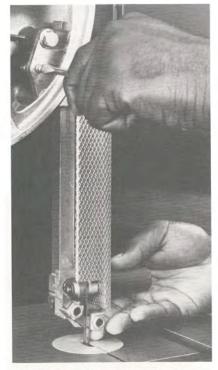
To adjust the tension on the upper blade guide height lock, turn the adjusting screw on the left side of the guide post retainer.
